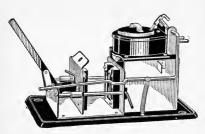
"Kaster Kit," for making lead soldiers, cannon, etc.
